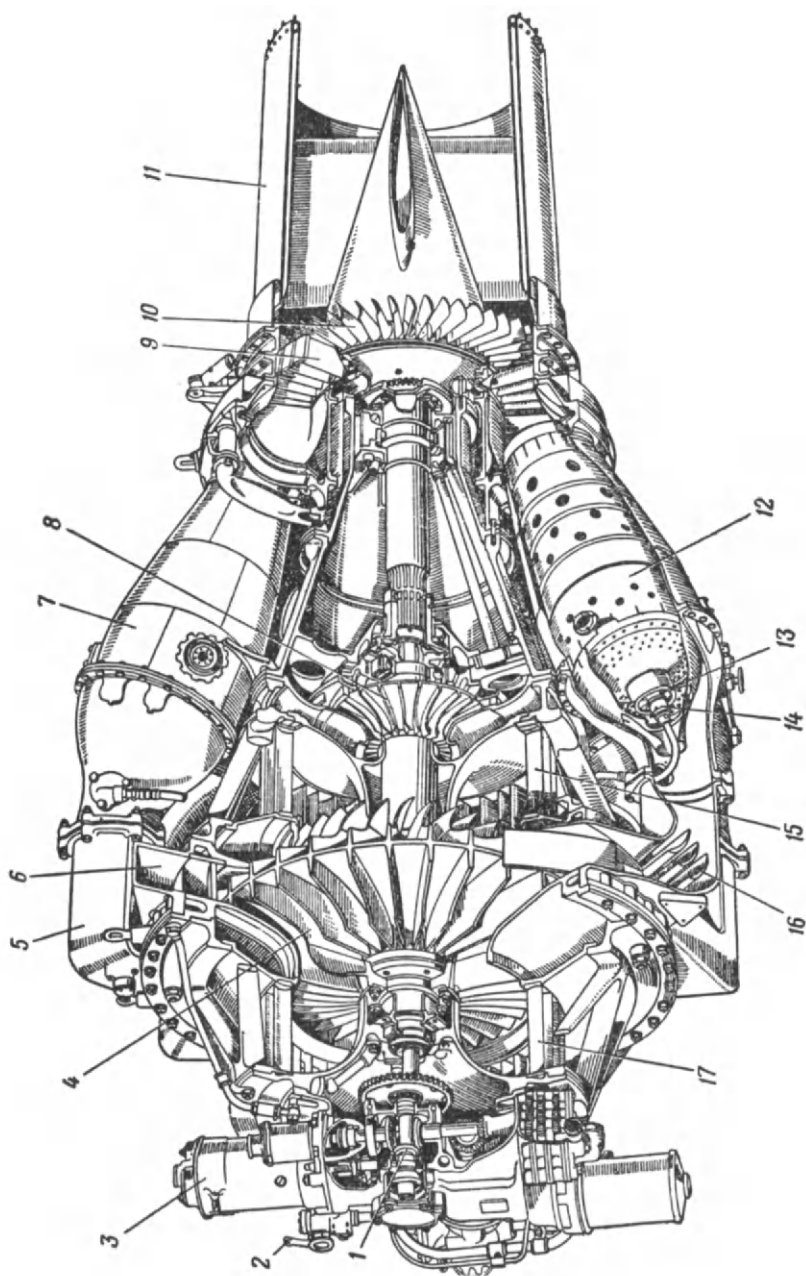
Construction of a turbojet motor with a centrifugal compressor. 1, auxiliary component shaft; 2, fuel regulating lever; 3, electric starter; 4, compressor wheel; 5, manifold; 6, compressor diffuser; 7, combustion chamber; 8, cooling fan; 9, turbine stator; 10, turbine; 11, turbine; 12, motor nozzle; 13, air turbulator; 14, fuel jets; 15, aft air intake; 16, section through an air duct; and 17, forward air intake.
